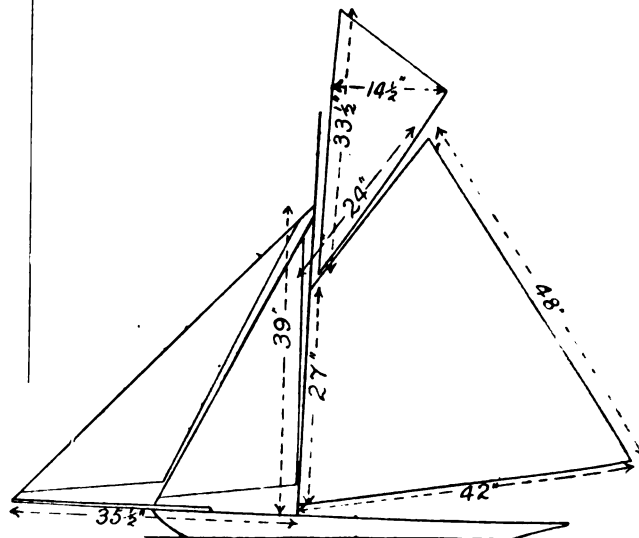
SAIL PLAN FOR MODEL RACING YACHT, DESIGNED UNDER THE NEW INTERNATIONAL RULE.
